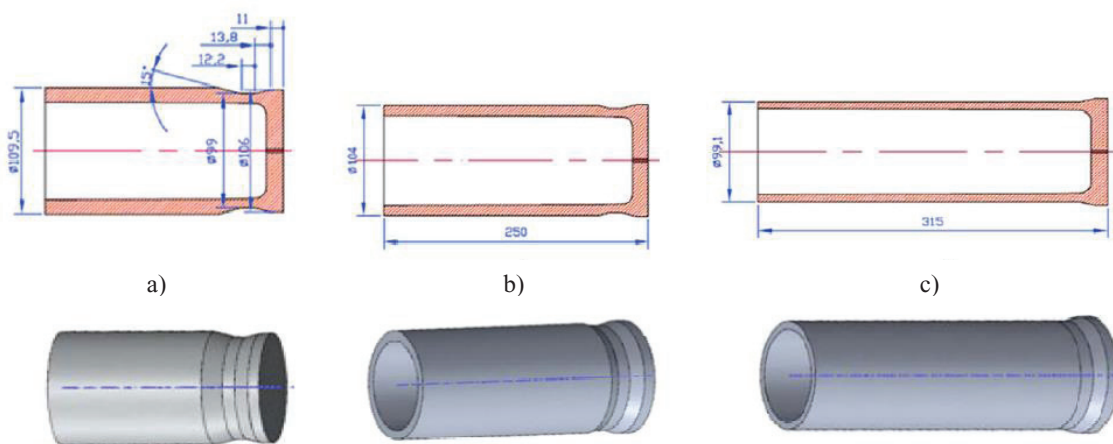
The workpiece in the different stages of processing (a) Preform; (b) Workpiece after the phase I; (c) Workpiece after the phase II [2]
